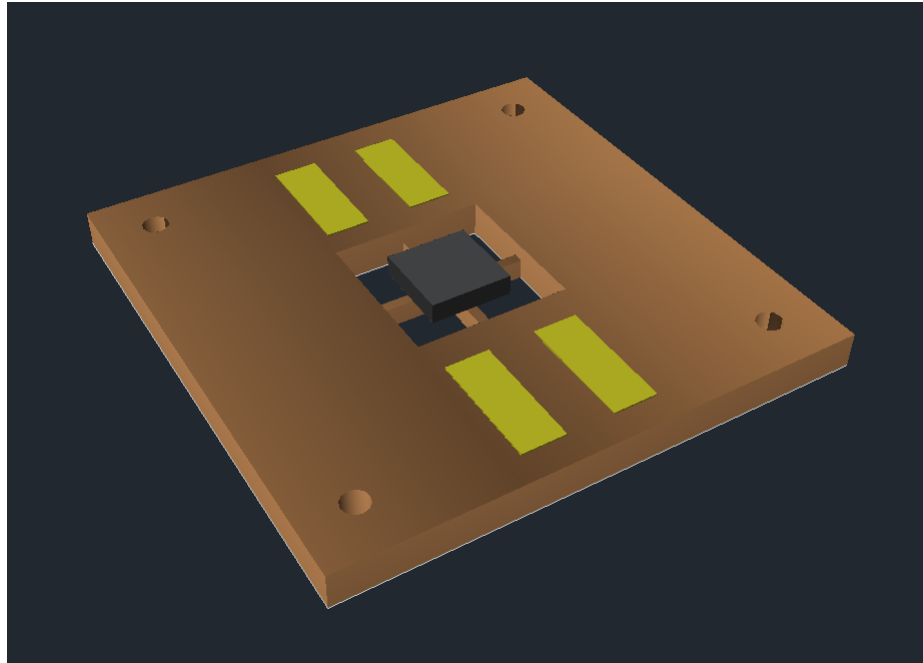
AutoCAD drawing of one of the possible designs for the chips with a cross-shaped holder for the Si sample (black) and four gold pads (yellow) for wire bonding
